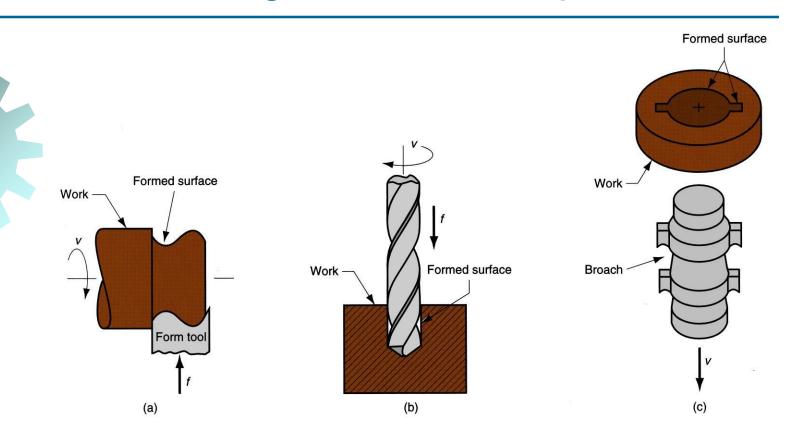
Forming to create shape: (a) form turning, (b) drilling, and (c) broaching.
